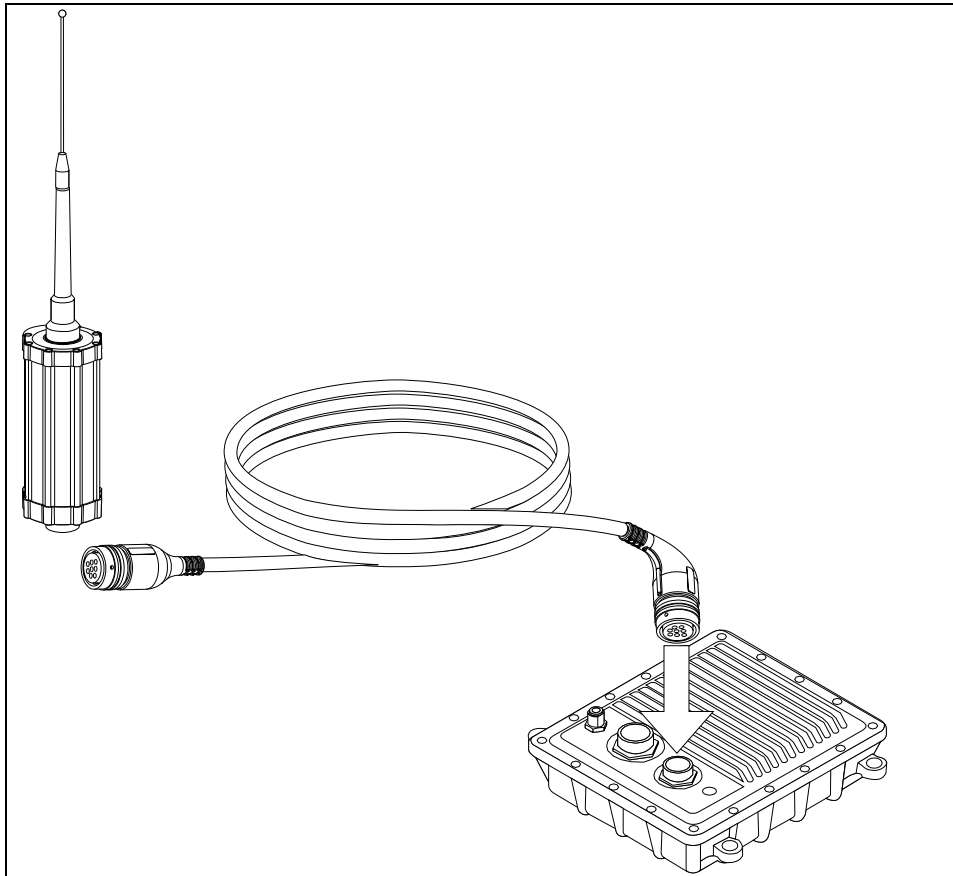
Power and I/O Cable (P/N 32942-17)
